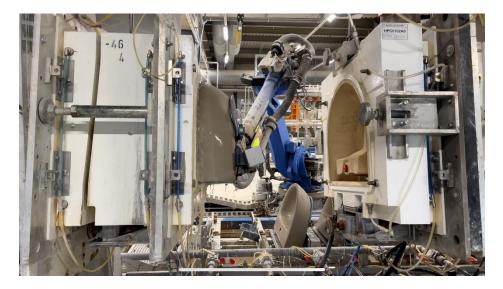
De-moulding process - closed mould on the left, open mould in the middle
